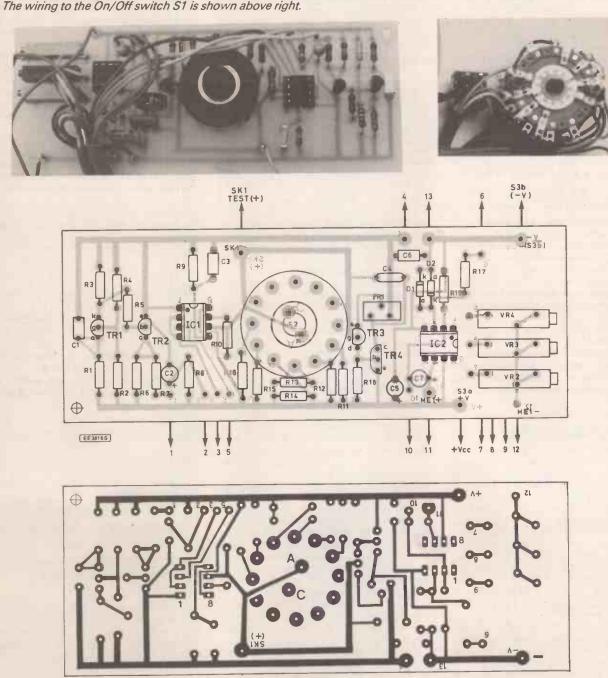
Printed circuit board component layout and full size copper foil master pattern. The small numbers on the track-side are included for those who wish to wire switch S7 directly to the copper pads/pins side. The "leads" around the component side are to assist topside wiring, if preferred.
